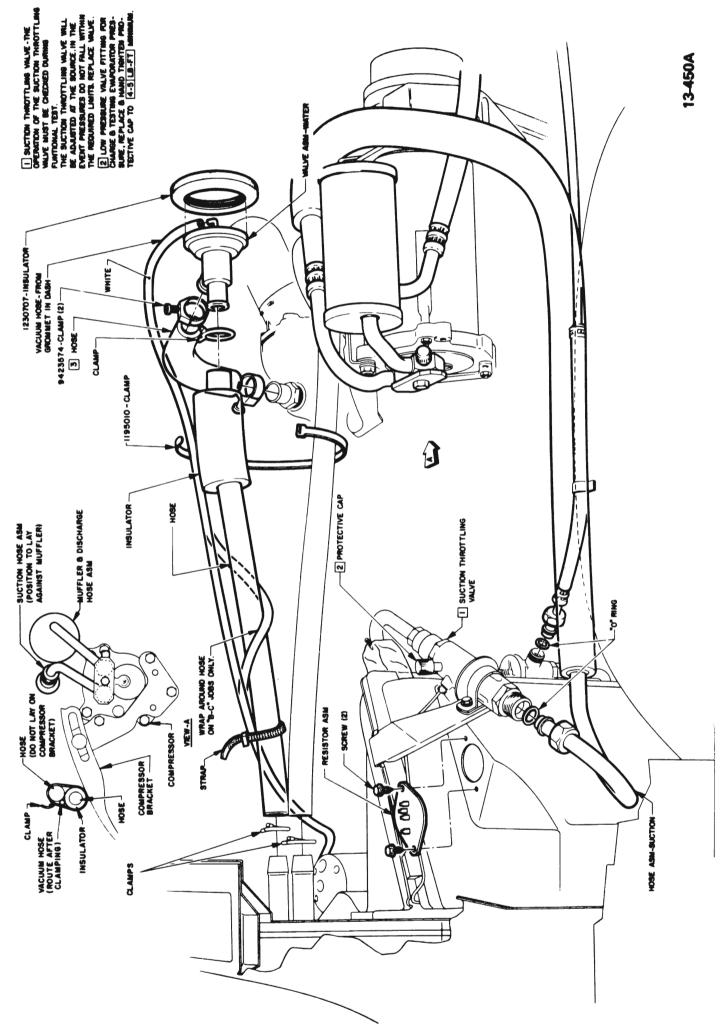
4L-4N-4R-4P-4U-4V-4Y Air Conditioning - Manual - Hoses to Compressor, Water Valve and Evaporator
